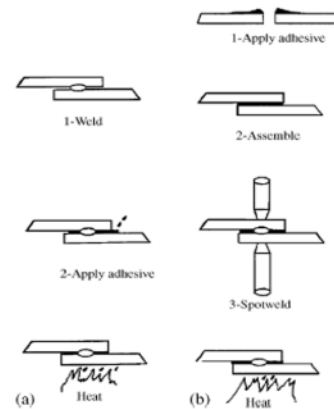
(a) Flow-in technique, (b) Weld-through technique [10]
